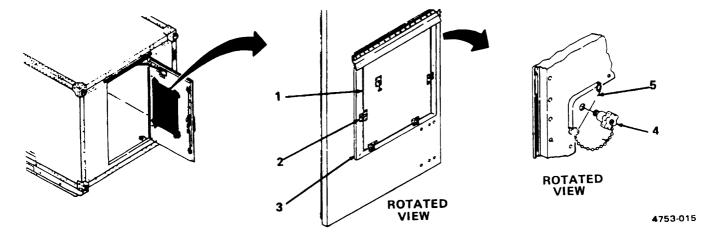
Emergency Exit Panel Assembly Replacement.
